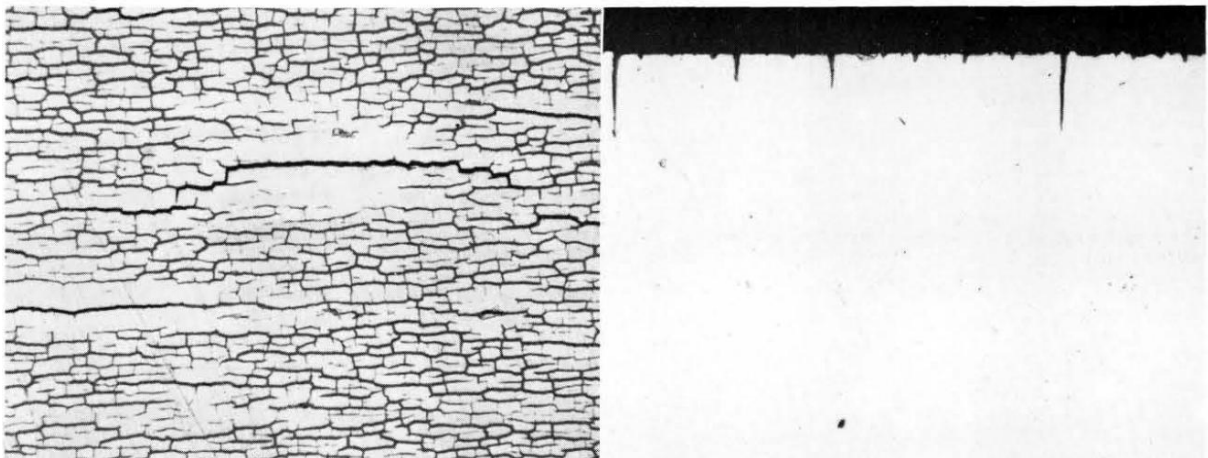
Exemplary heat-checking pattern on surface and cross-sections after thermal cycling [13].
